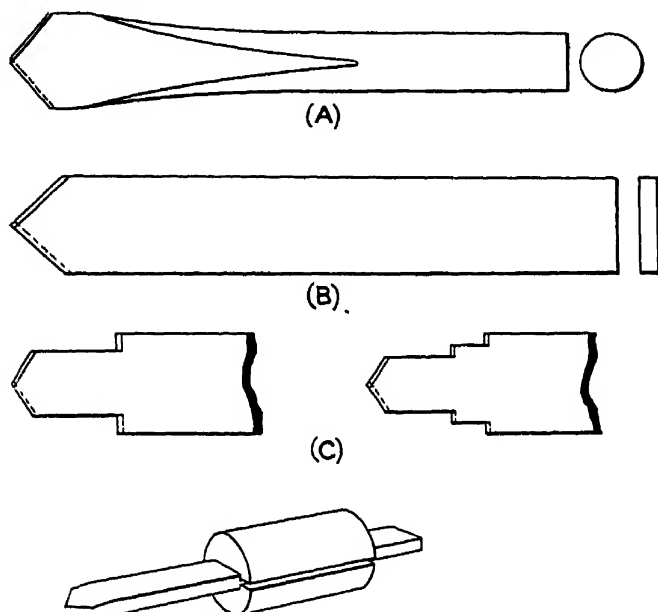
EXAMPLES OF FLAT DRILLS, AND PAD TO ENABLE B AND C TO BE HELD IN A TURRET OR CHUCK
